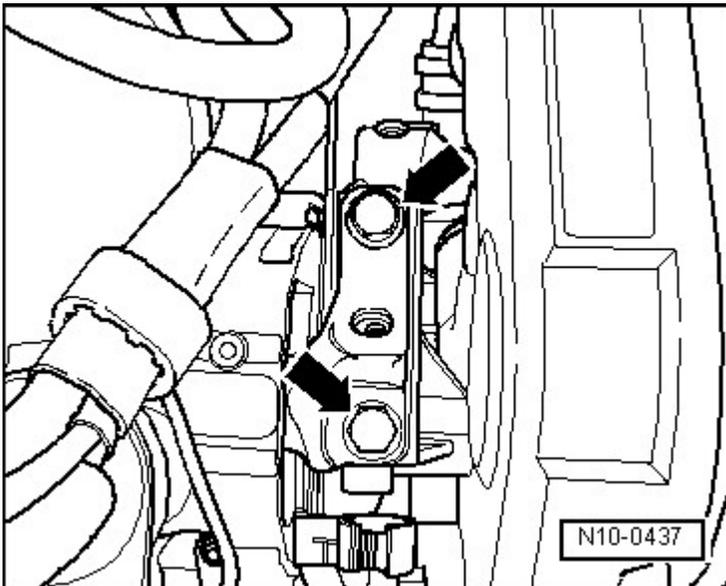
Identifying Mounting Bolts Of Subframe Mount/Engine Bracket
